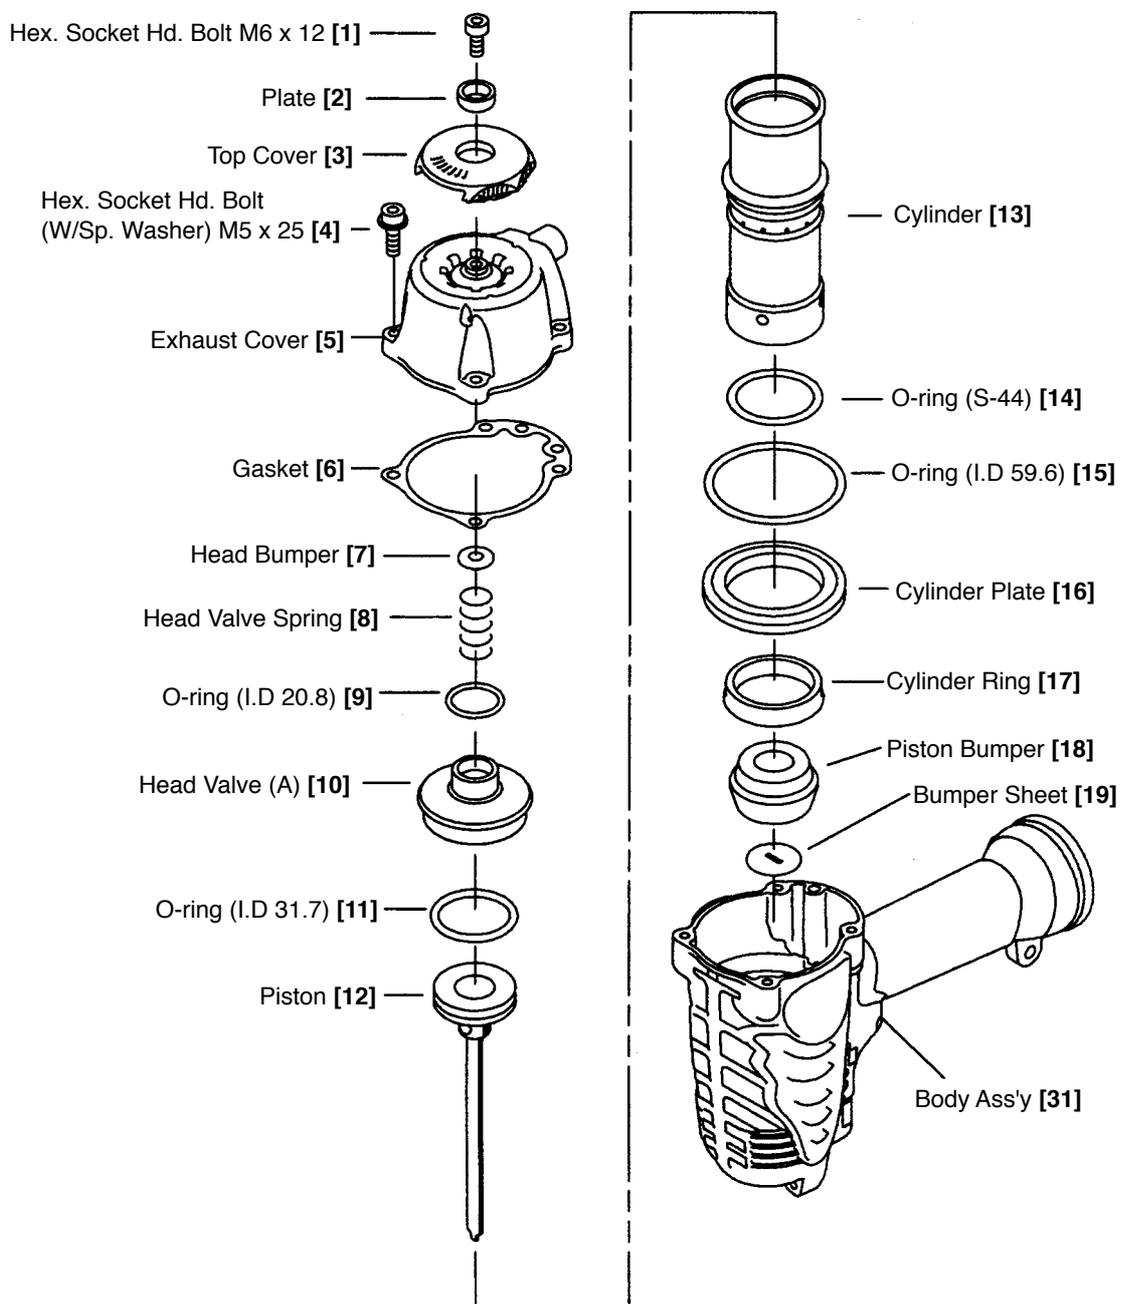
Disassembly and reassembly of the exhaust cover, head valve (A), cylinder piston, piston bumper, etc.
